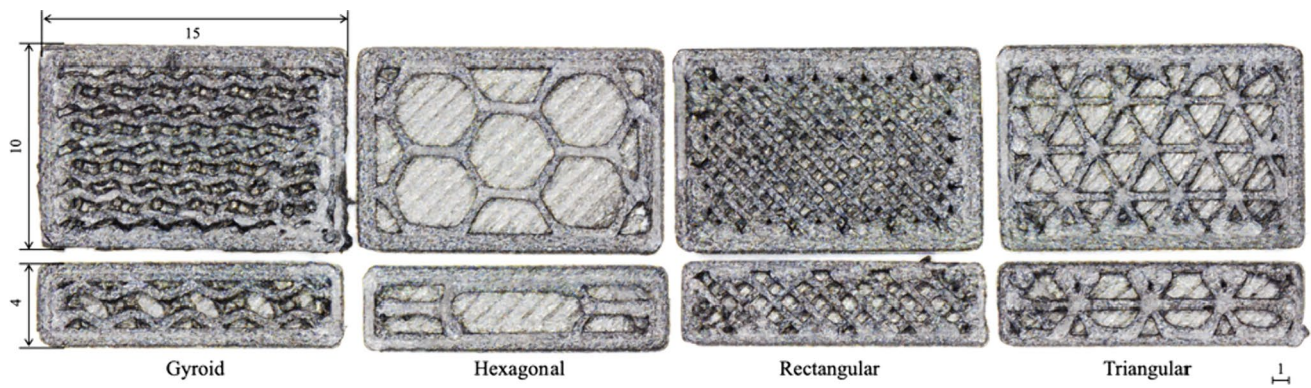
Dimensional analysis of the infill patterns (all dimensions in mm)
